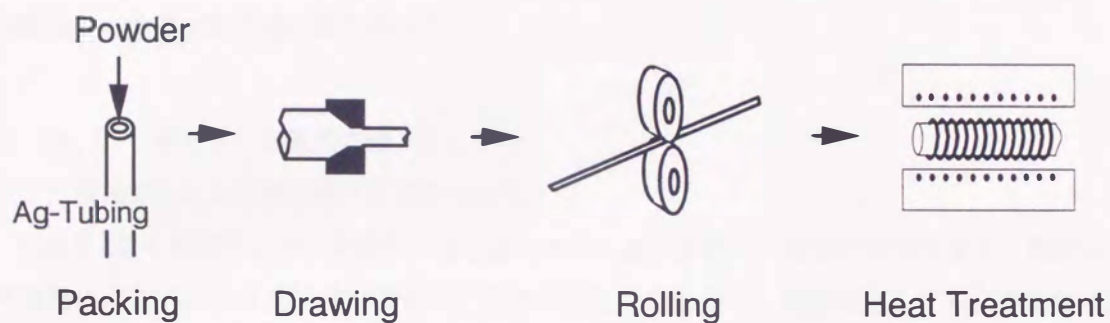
A schematic drawing for fabrication process of a HTS tape shaped wire.
